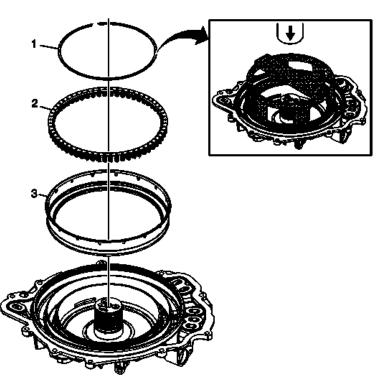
Identifying Low & Reverse Clutch Piston Courtesy of GENERAL MOTORS COMPANY
